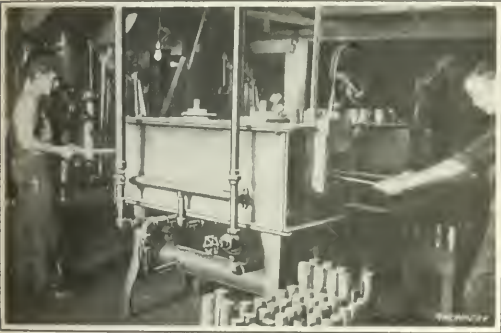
Stewart Gas Furnace used for heating Castings previous to hot-pressing
